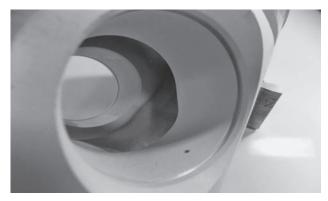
The result of penetrating test of the bolt hole of the diesel engine piston [16]
